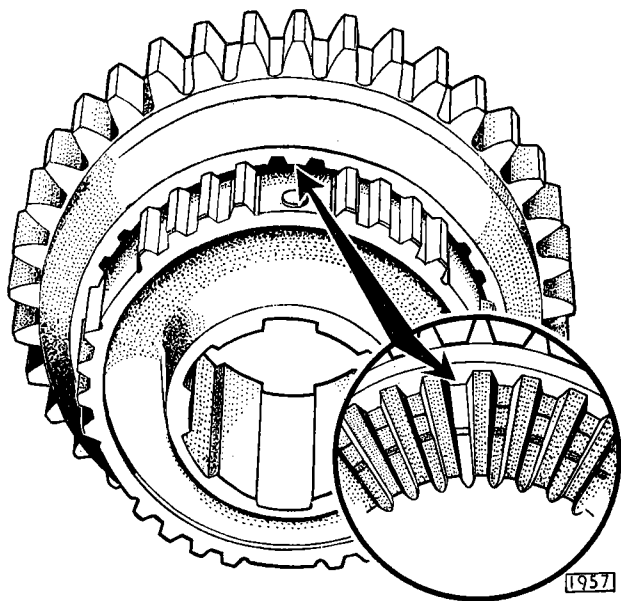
When fitting the 1st speed gear to the 2nd speed synchro-sleeve the relieved tooth on the internal splines must be in line with the stop pin in the sleeve
